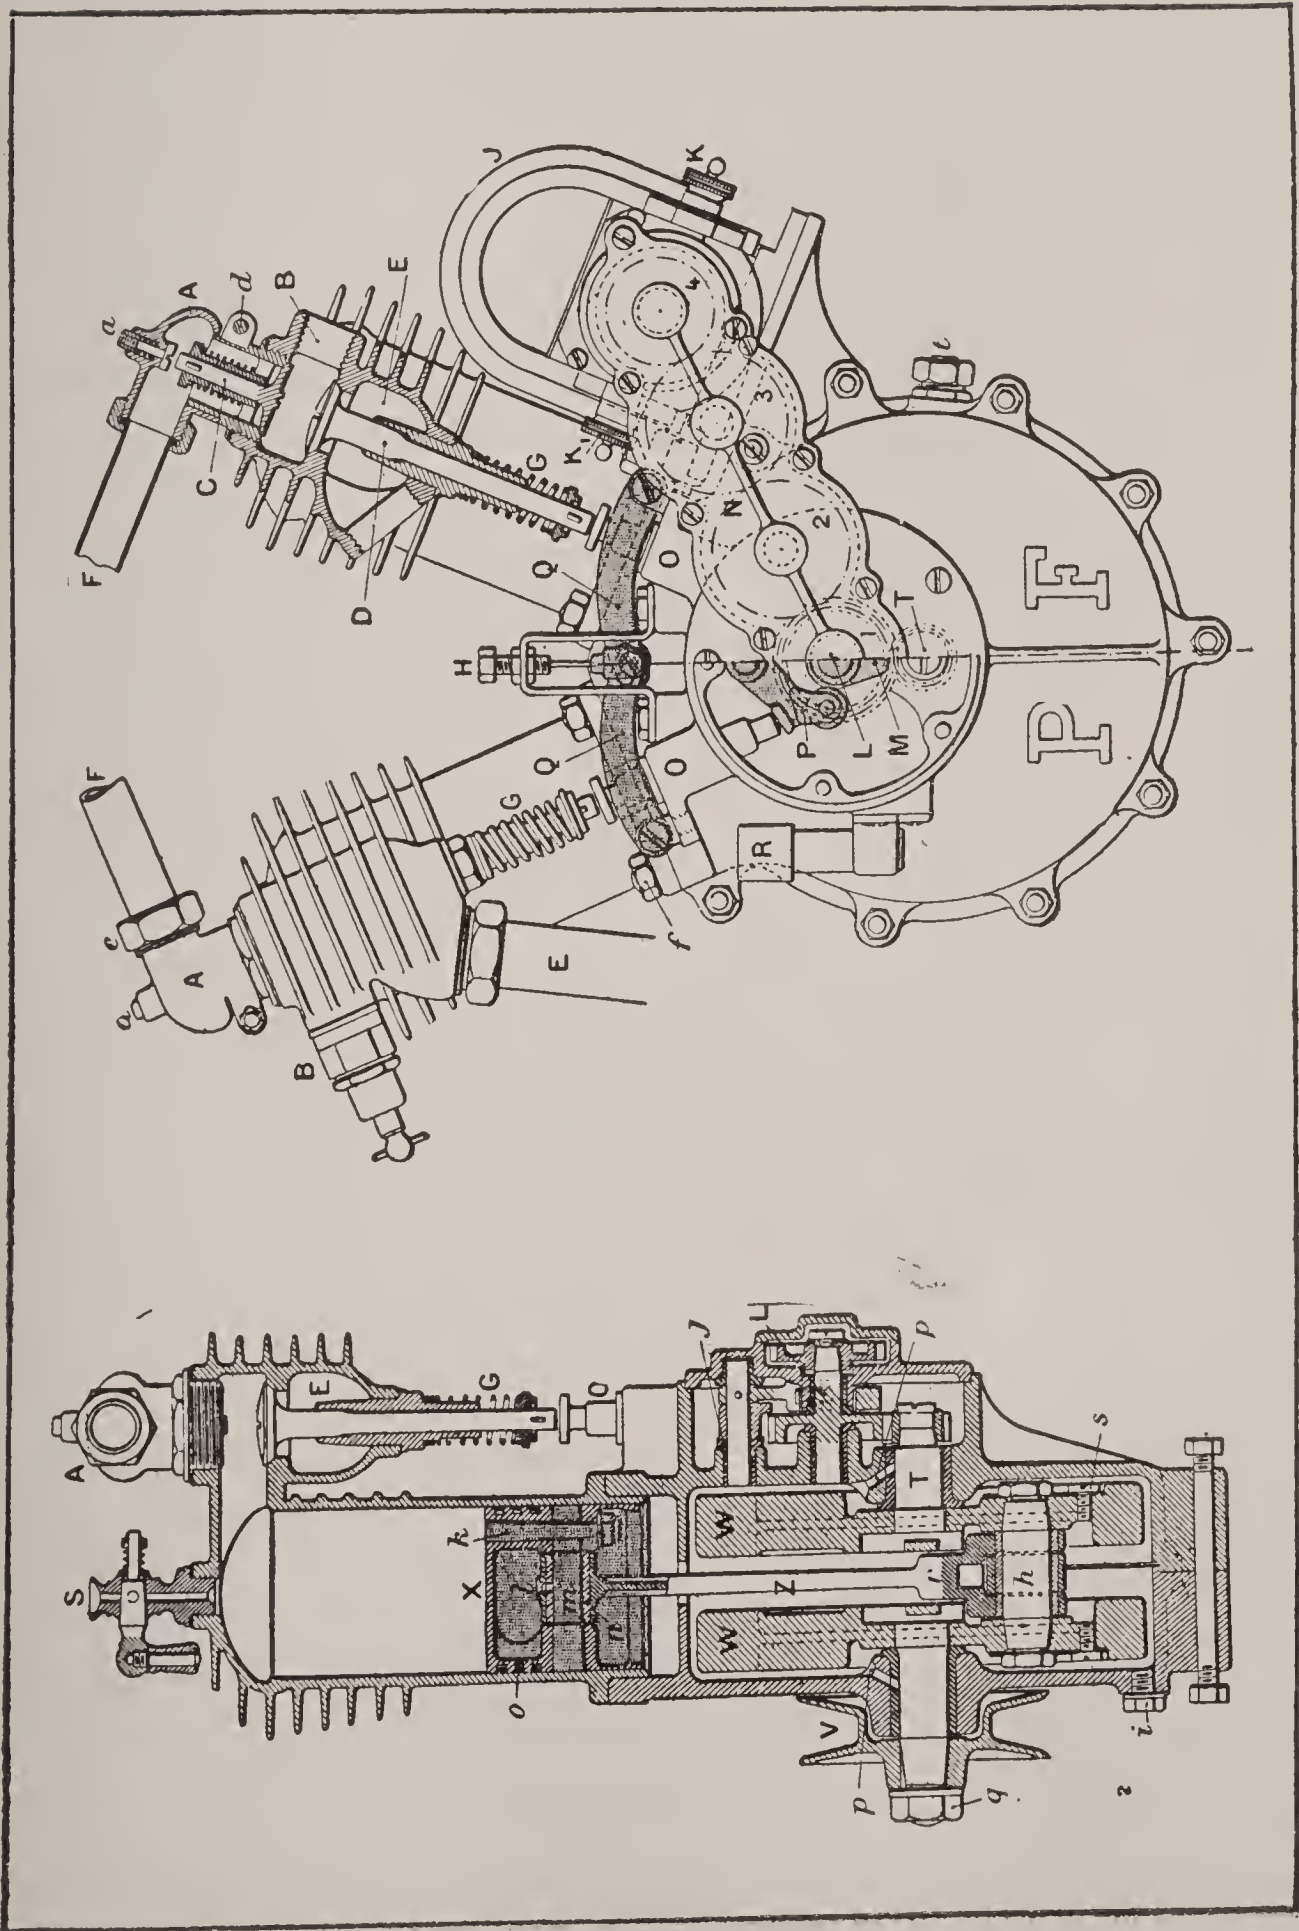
Sectional Views of Peugeot Motor, Showing Automatic Inlet Valves.
